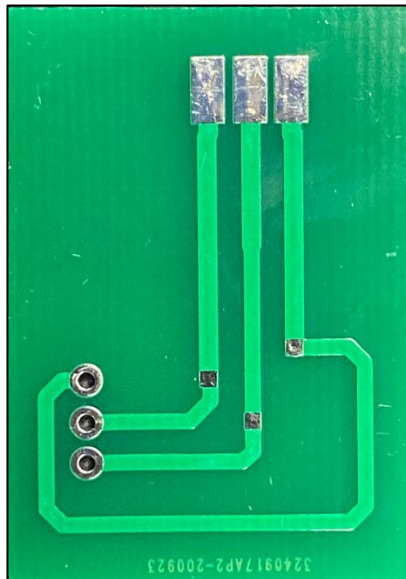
Picture of designed and fabricated PCB for in situ resistance testing
